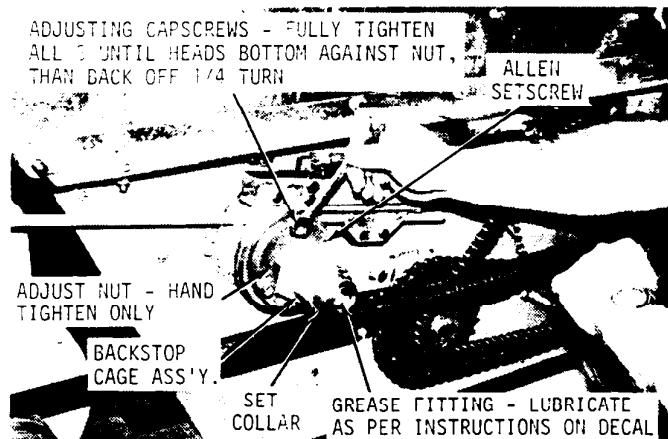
ADJUSTING THE TORQUE LIMITER ASSEMBLY
